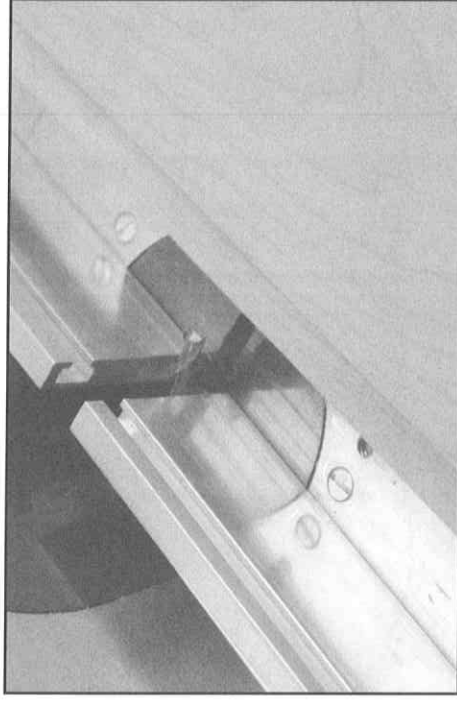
When using a straight bit to cut the bevel, the table is tilted to the desired setting.
